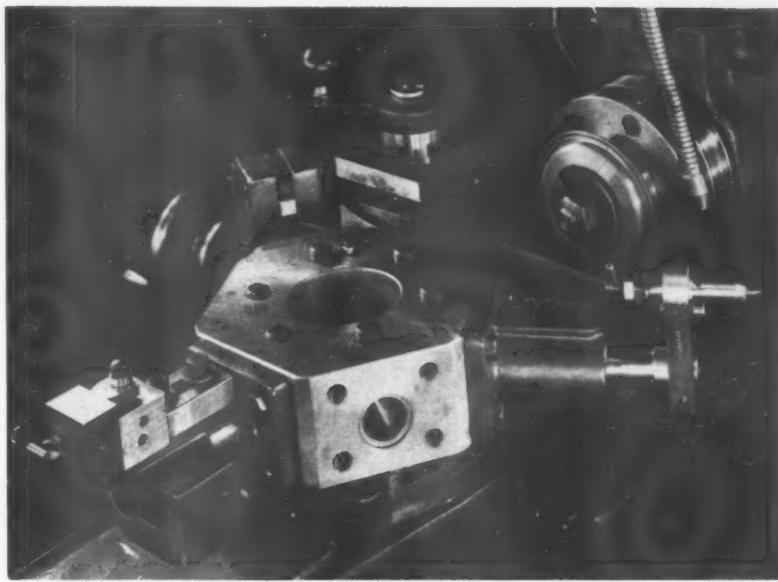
Figure III. Second operation on electric typewriter segment on No. 4 Gisholt Universal Turret Lathe.
